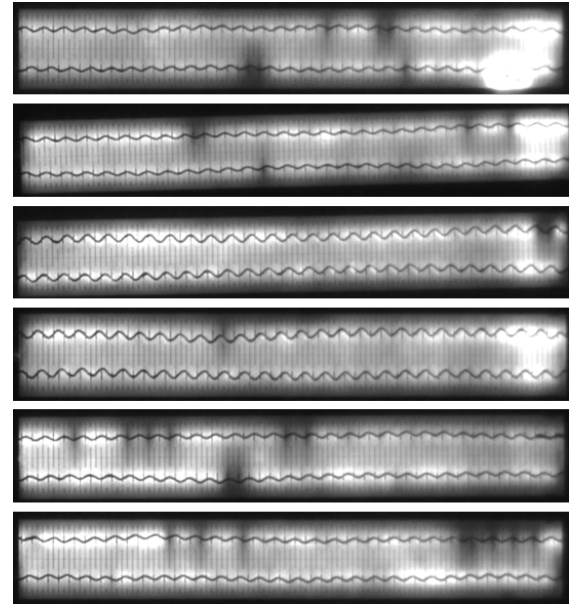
Electroluminescence (EL) images taken after soldering of the cell stripes with linear pads using wave-shaped wires. The pad geometry for all stripes is 1 mm x 0.2 mm. The Ag paste was printed on 100 nm SiN_x .
